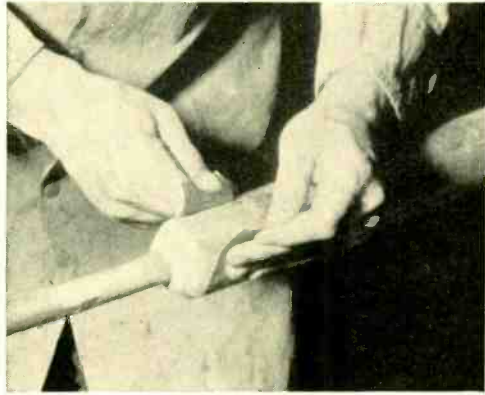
Cable and sleeve are taped with paper to prevent the solder from spreading
